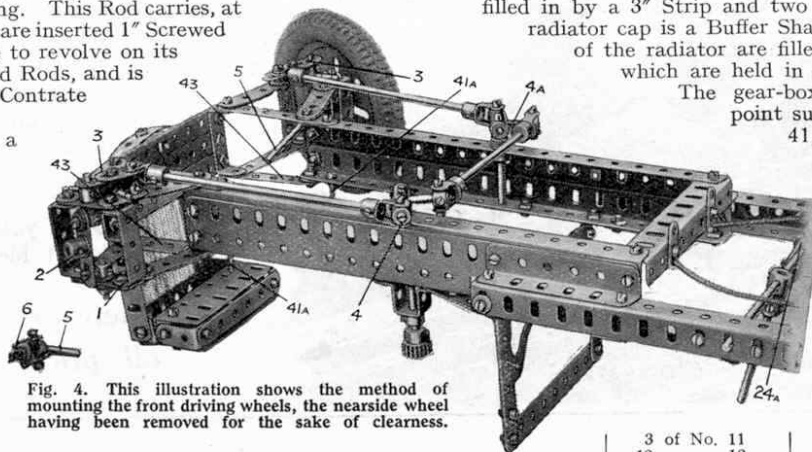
This illustration shows the method of mounting the front driving wheels, the nearside wheel having been removed for the sake of clearness.
